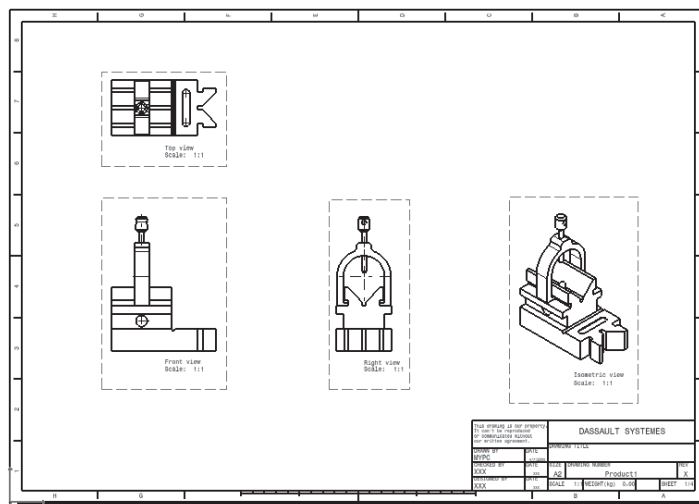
The drawing sheet, after generating the front, top, right, and isometric views
